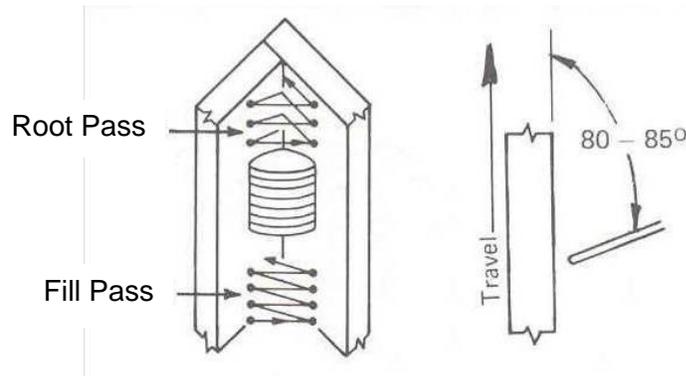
Typical Weave Pattern for Vertical-Up Welding¹⁶
